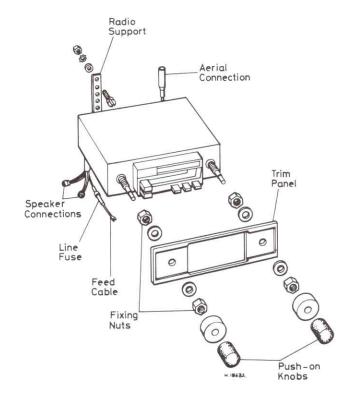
Mounting component details for radio/cassette unit (Sec 29)
